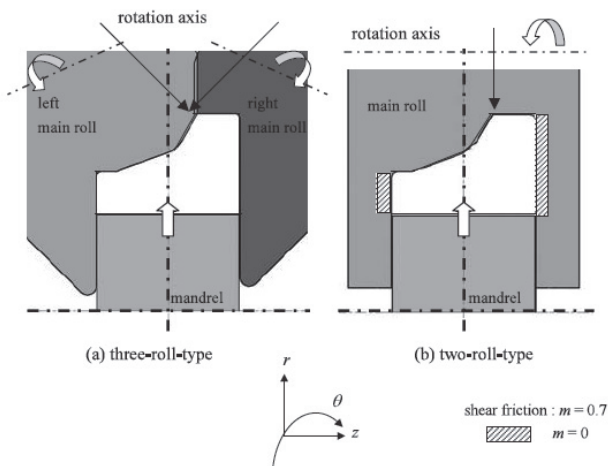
Schematic diagram of 2-roll-type and 3-roll-type tapered ring rolling mill.
